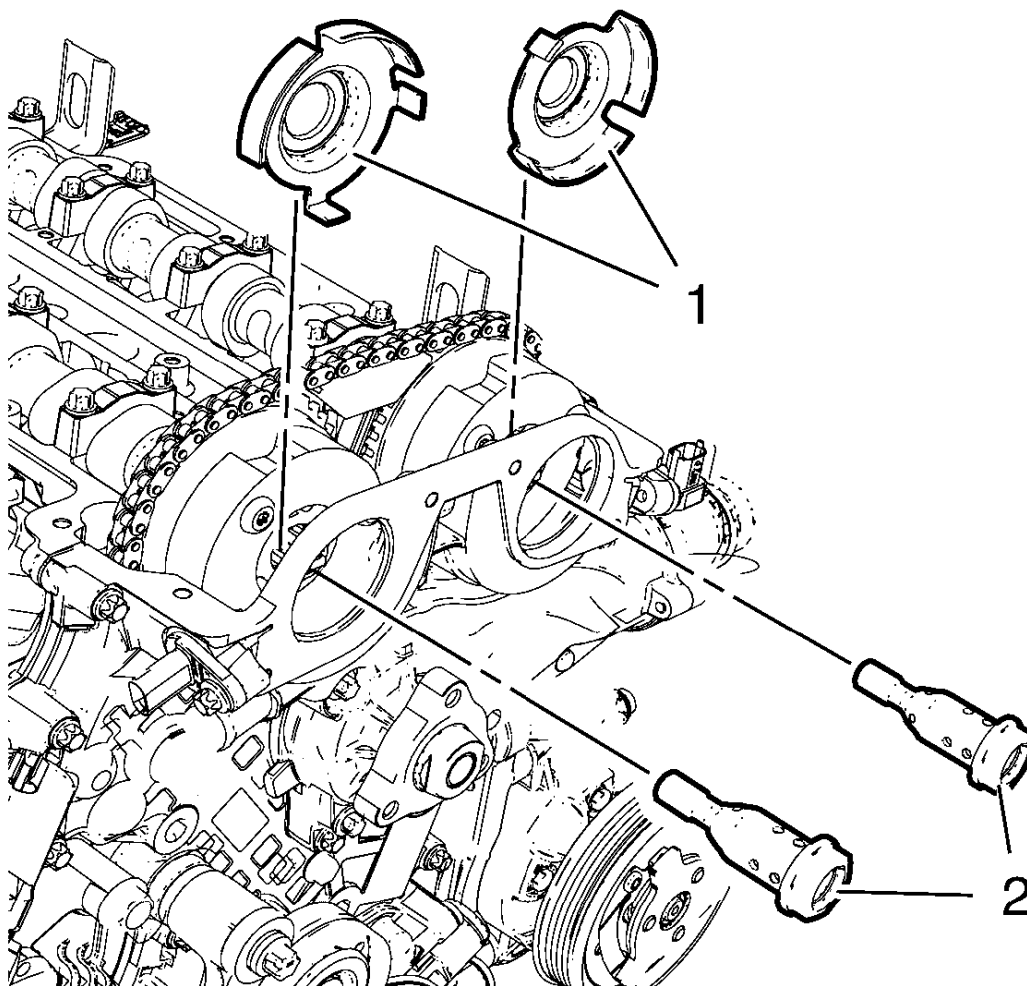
Camshaft Position Exciter Wheels And Camshaft Sprocket Bolts
